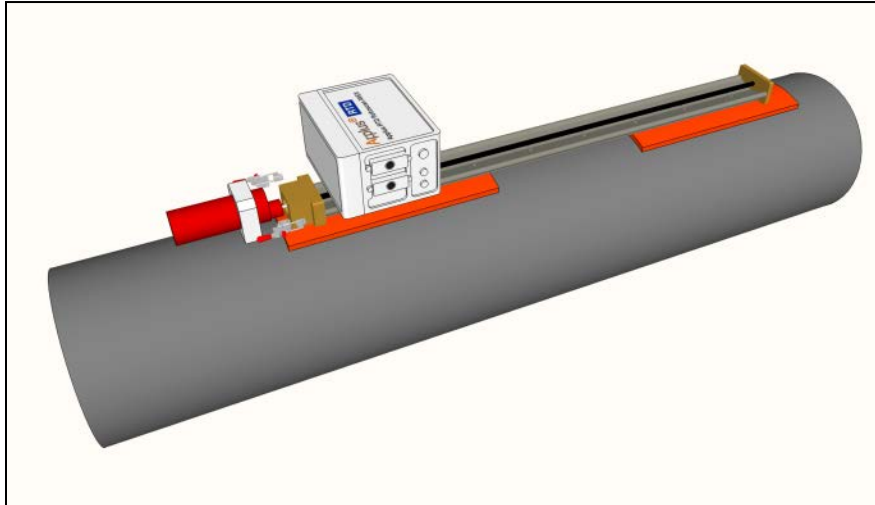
Linear scanner with the motor assembly on the left and the IWEX processor mounted on top
